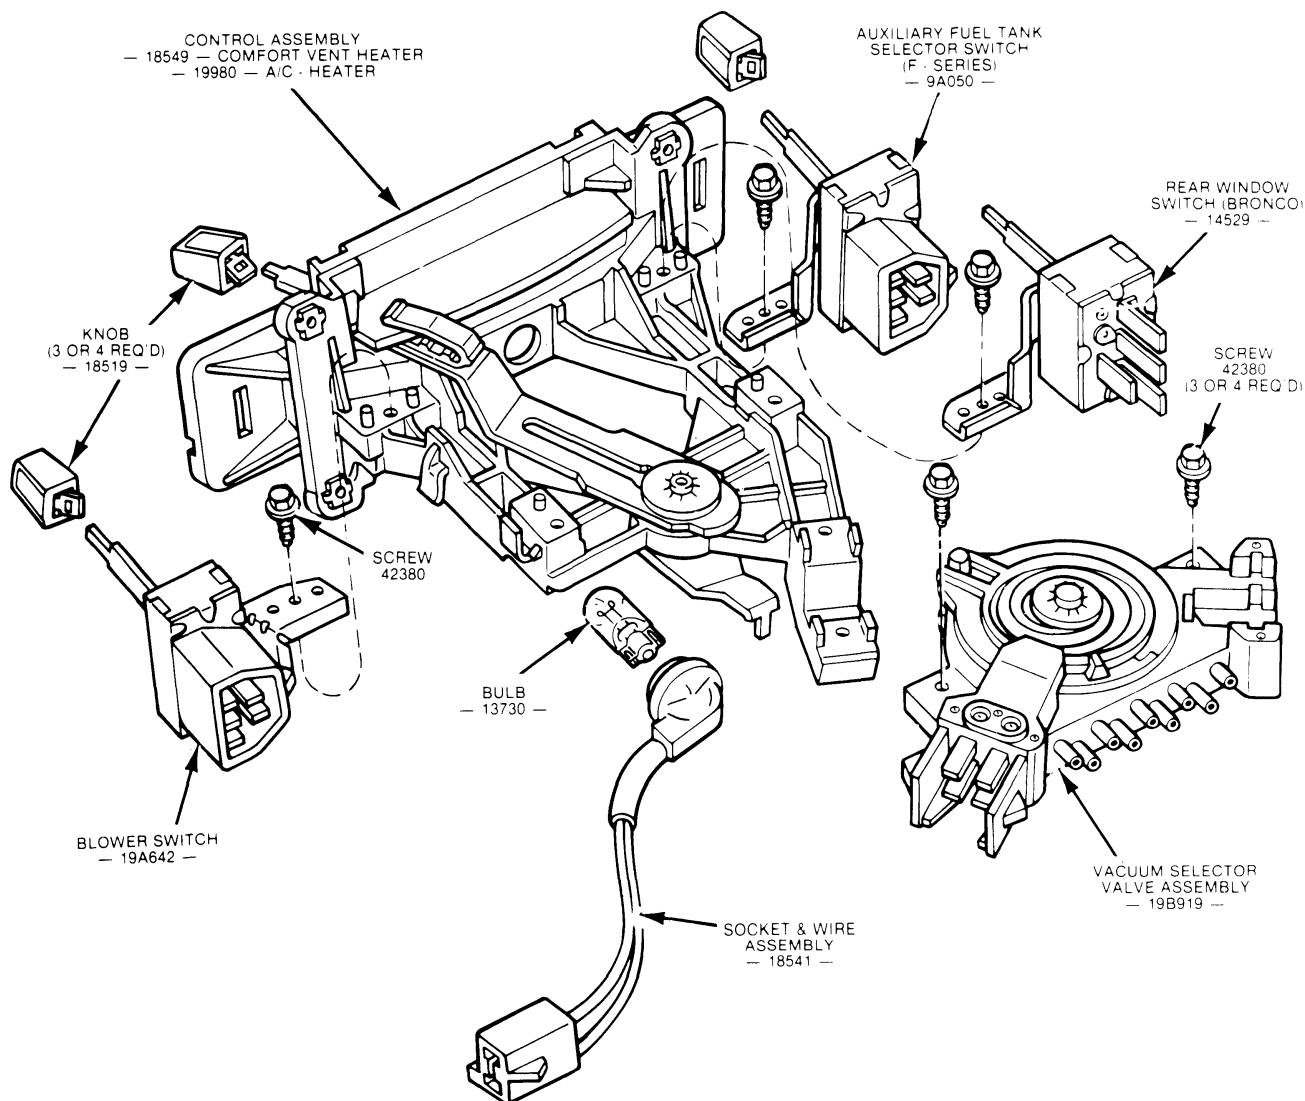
Comfort Vent Heater Control Assembly Disassembled
